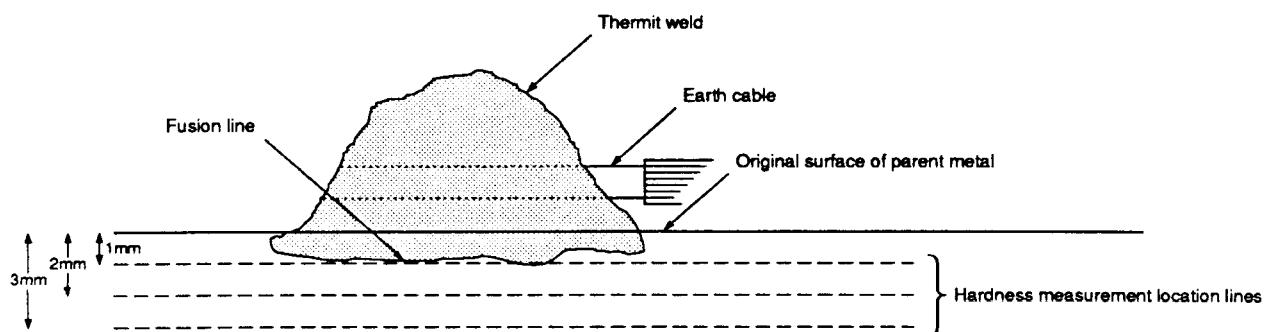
CROSS SECTION THROUGH THERMIT WELD
